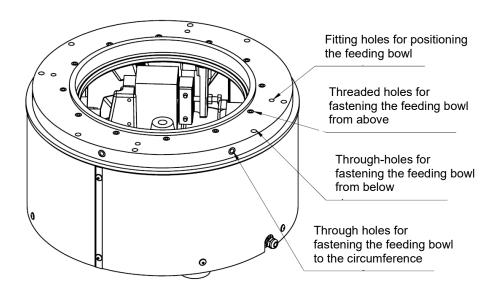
Fitting and threaded holes for mounting the feeding bowl
